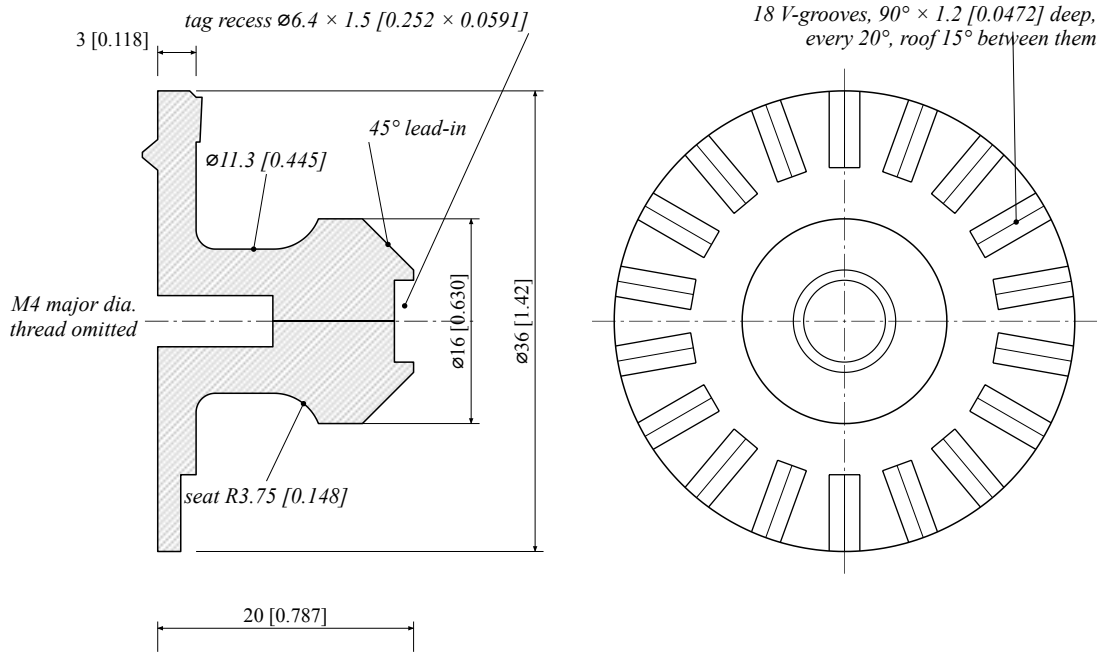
UGP-M stud, section and front view. The upper half of the section passes between two grooves and through a spur, the lower half along a groove. Dimensions in millimetres, inches in brackets.
